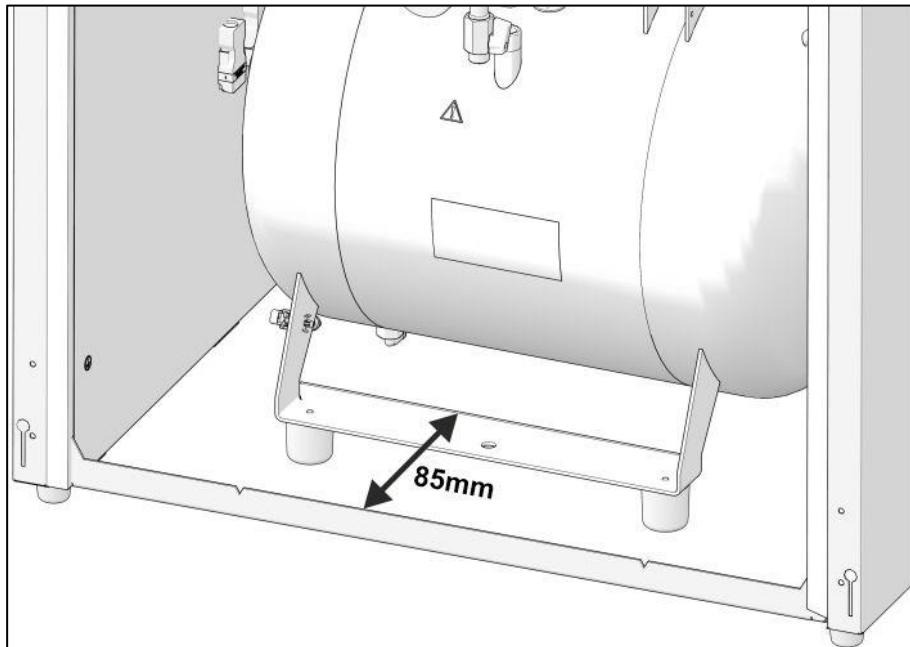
Positioning of the DK50 2V/50/M compressor in the cabinet
